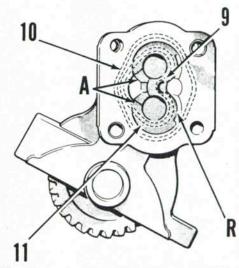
When reassembling pump, be sure that recess (A) on bearings faces the gears and radius (R) is on outlet side of pump.
